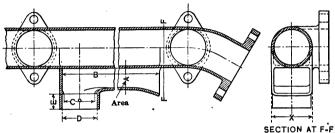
S. A. E. standard exhaust manifold air heater.
